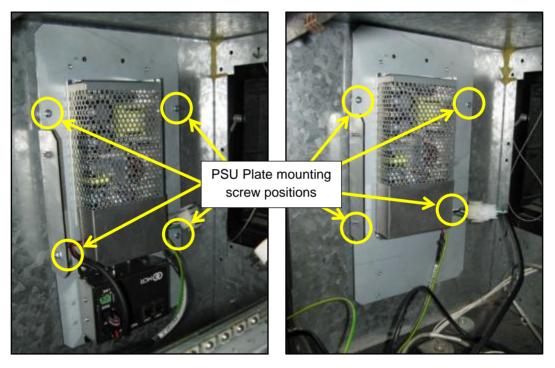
Side A - PSU Plate installation position - Side B
